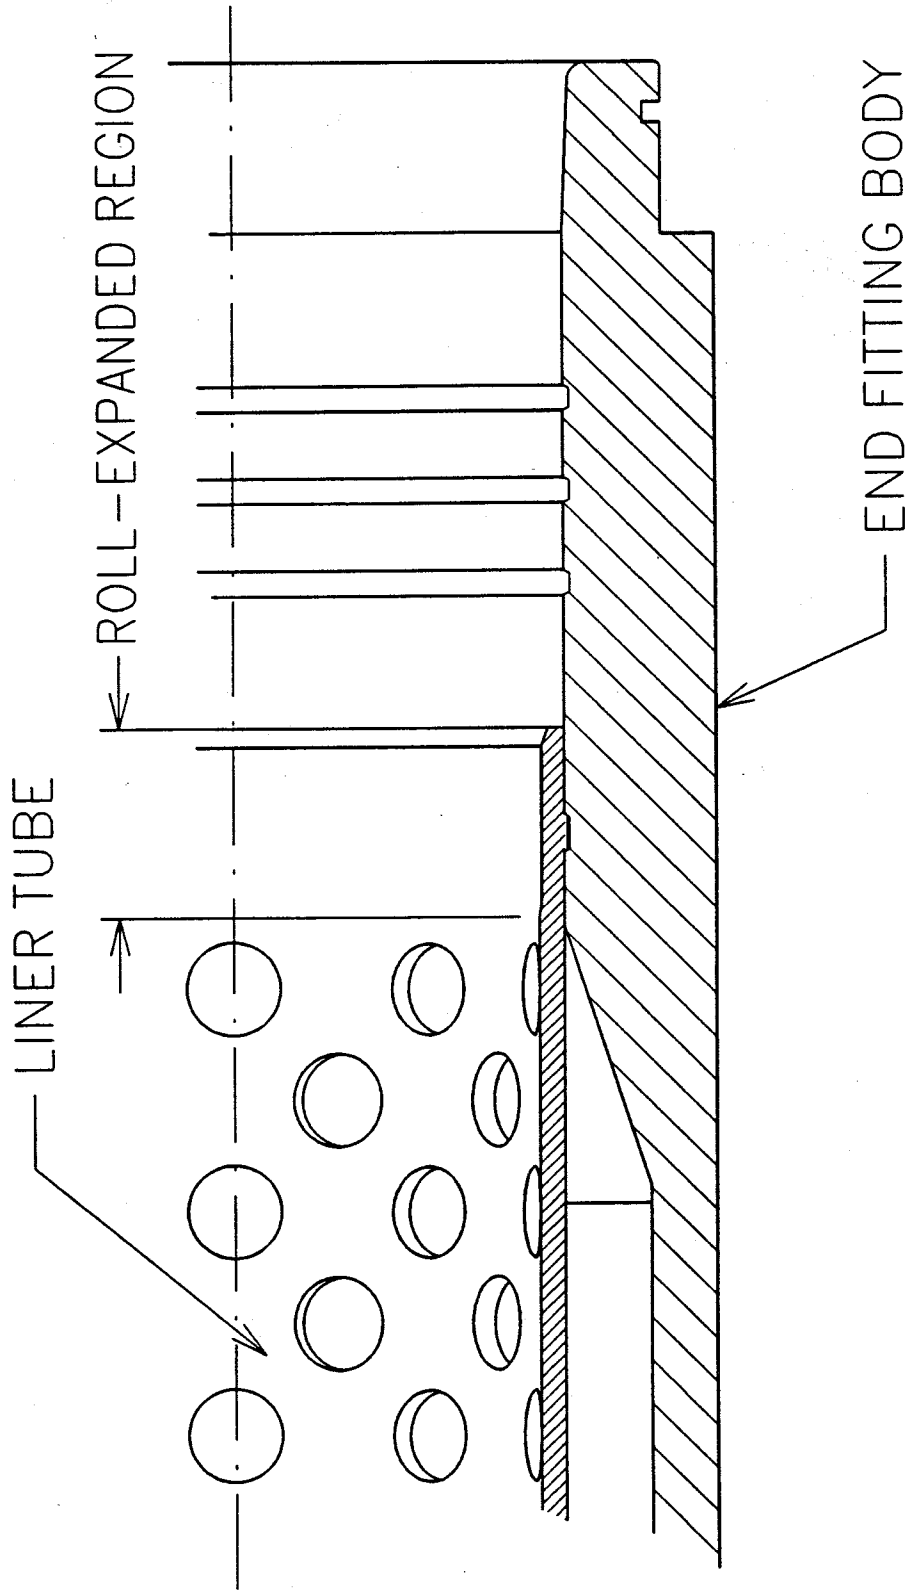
Liner Tube-to-End Fitting Roll-Expanded Joint
